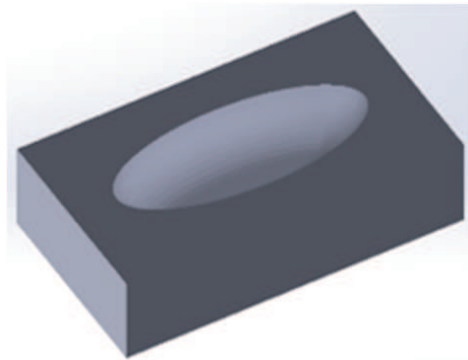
Calculation of tool paths for end milling injection molding dies.
